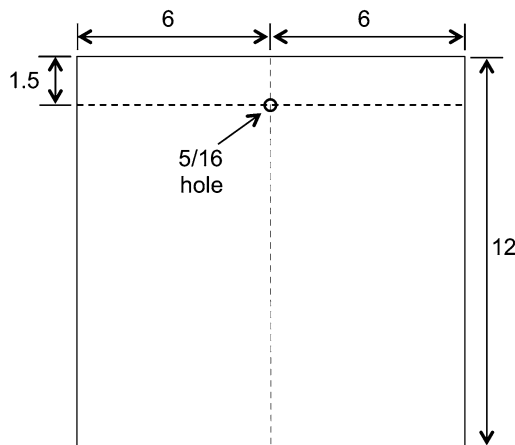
Location of holes in top and bottom plates for mounting to support rod
